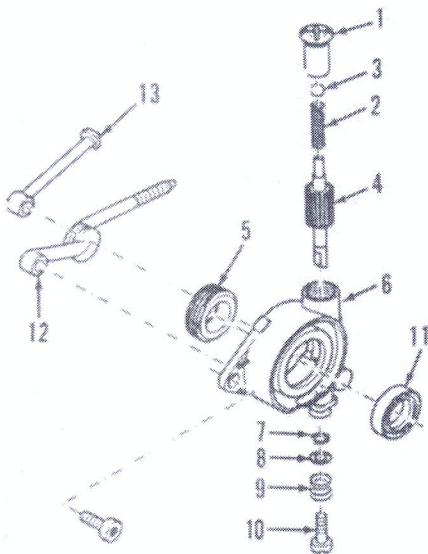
Exploded view of the automatic chain oil pump, typical of all models.
